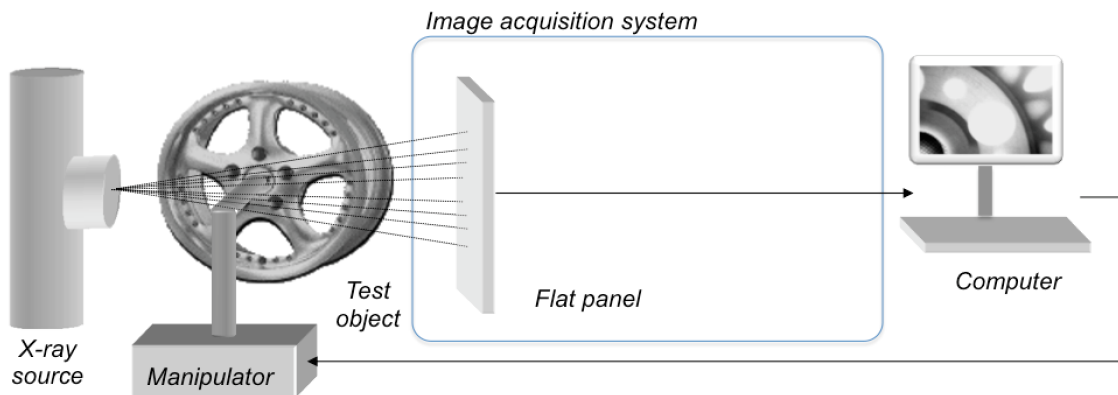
X-ray testing system. The image acquisition system is based on flat panels. In this example, an aluminum wheel is inspected using a manipulator.
